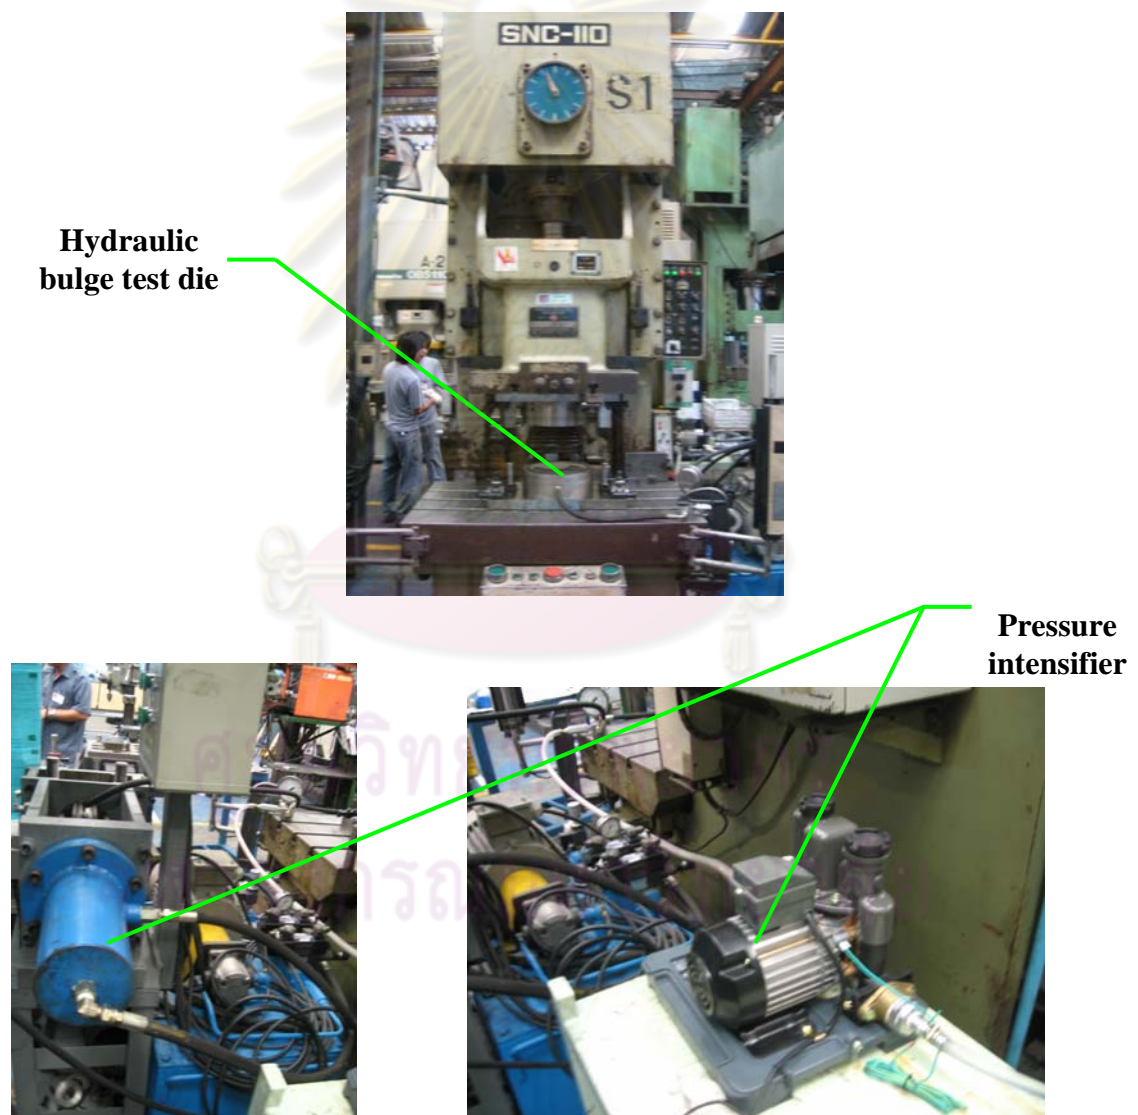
Pressure intensifier system built by BT Engineering Company
